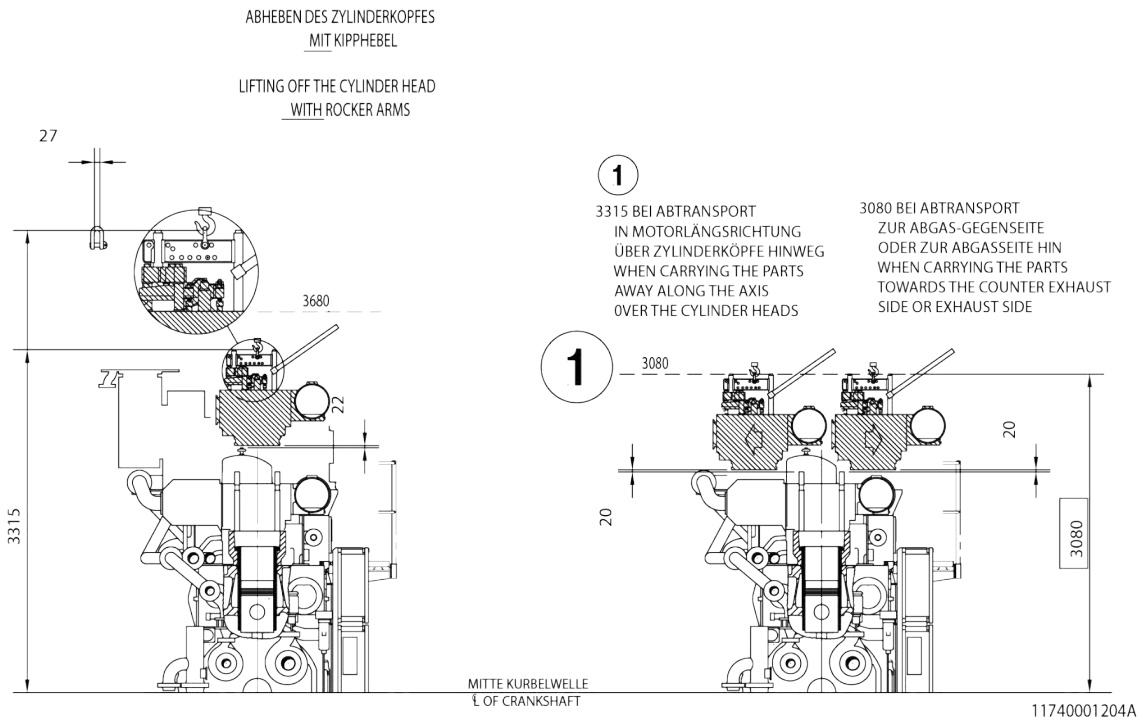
Piston removal – Lifting off the cylinder head with rocker arms – L engine
